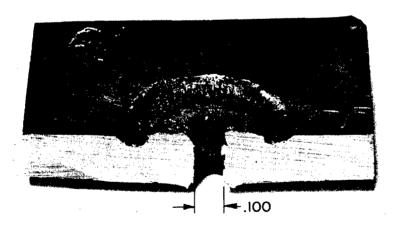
EXPLOSIVE HIGH PRESSURE RELEASE TEST ASSEMBLY
